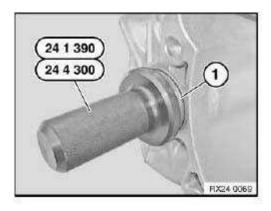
Identifying Special Tool (24 4 300) Courtesy of BMW OF NORTH AMERICA, INC.
